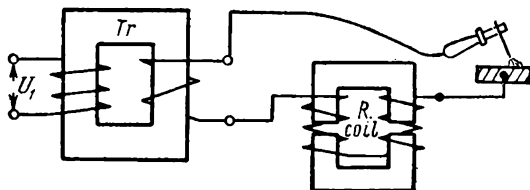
Welding transformer electric diagram for arc welding
